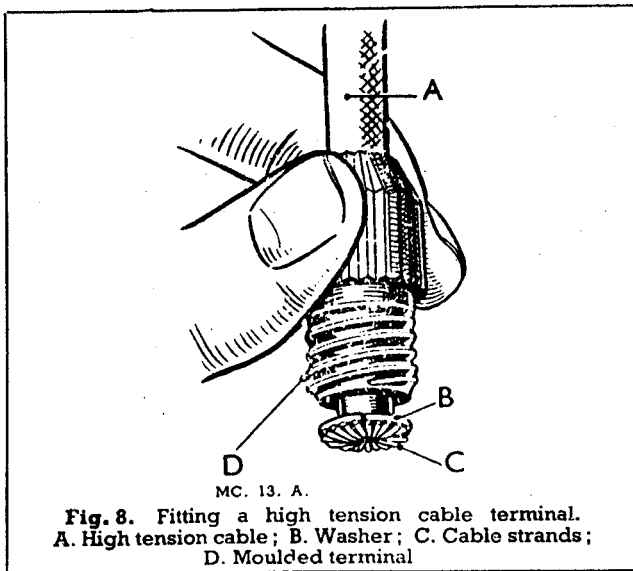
Fitting a high tension cable terminal. A. High tension cable; B. Washer; C. Cable strands; D. Moulded terminal
